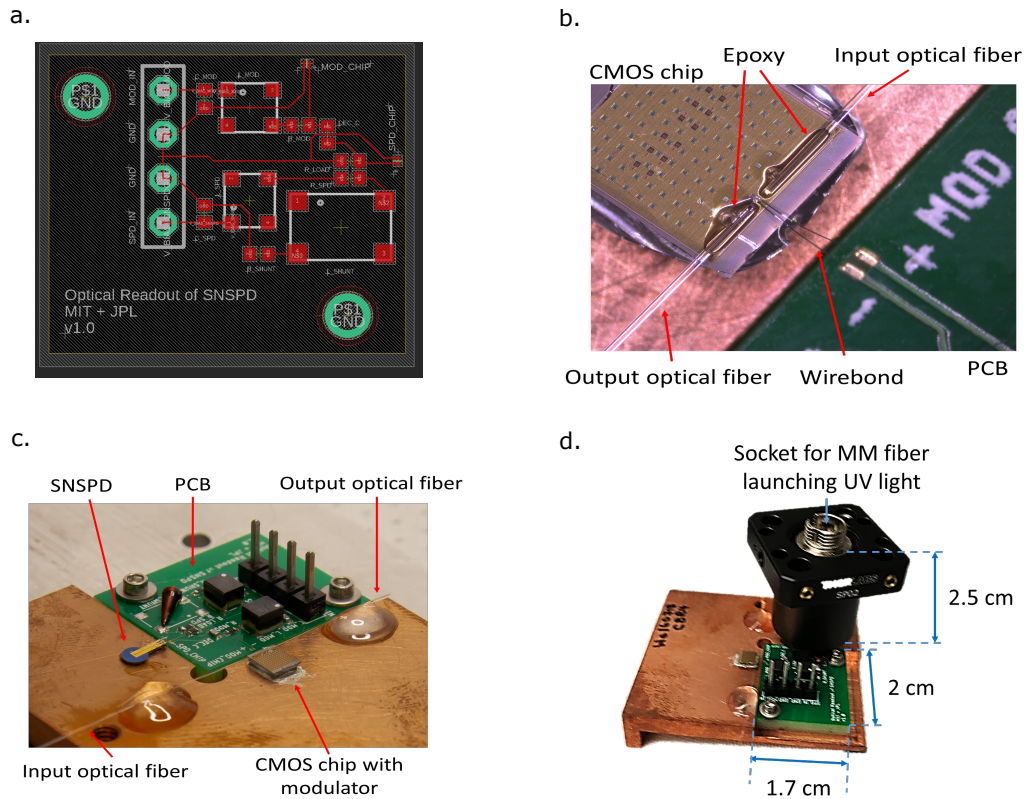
Optical readout system packaging. (a) PCB layout. (b) Packaged CMOS chip. The epoxied fibers are visible, as well as the wirebonds to the PCB. (c) Full packaged system. The SNSPD, the CMOS chip, the PCB and the attached optical fibers are all sitting in a copper chuck which attaches to the cryostat. (d) Full system ready for placing in the cryostat. A lens tube is used to launch UV light into the SNSPD and provide optical isolation between the UV and the infrared light. Representative dimensions are shown.
